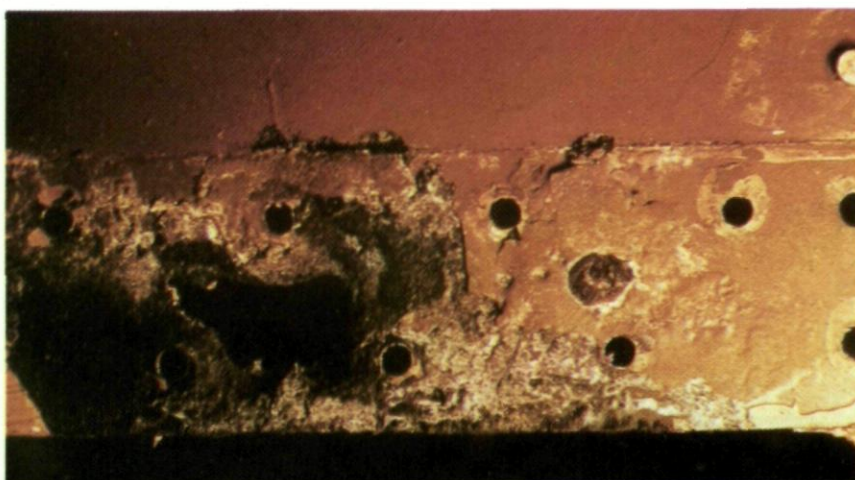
(a) Severe pitting in a magnesium alloy casting
